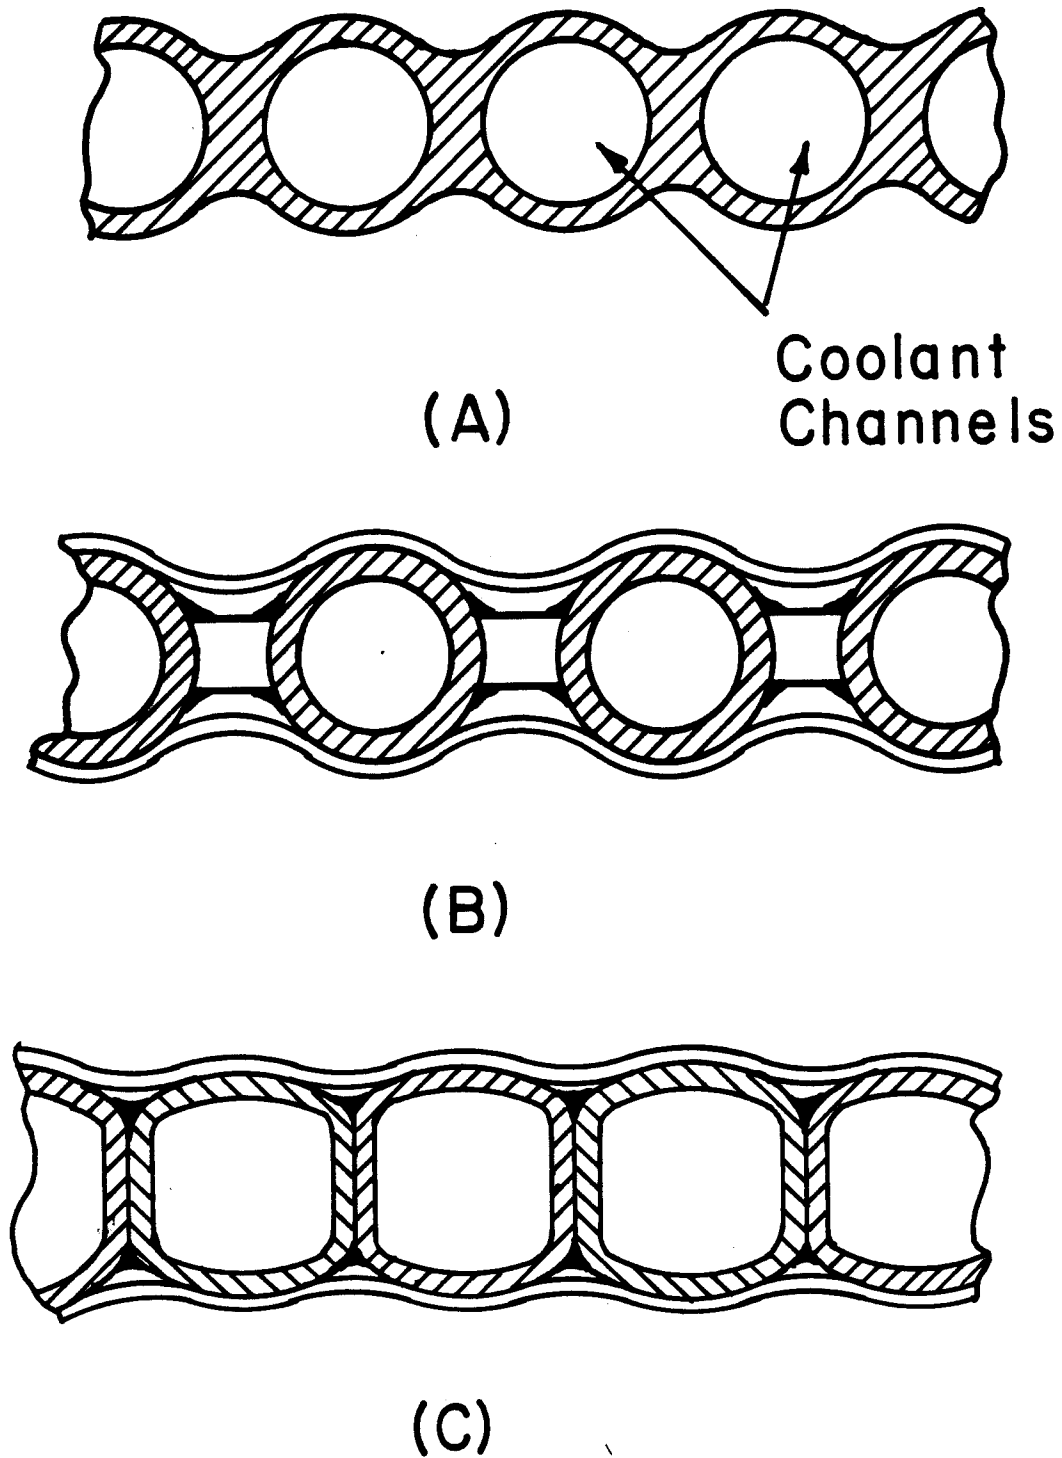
Typical membrane wall designs for first wall construction.
